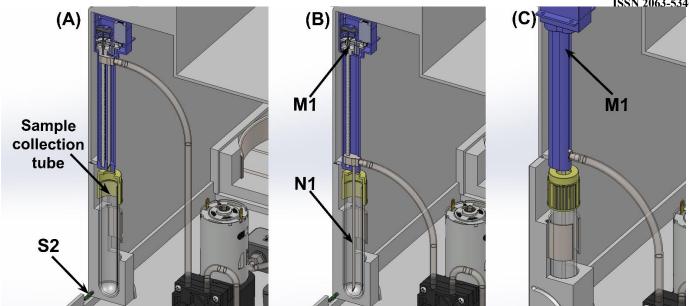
(A), (B) Cut section view in closed position of automatic sample collection tube holder, (C) closed position view of automatic sample collection tube holder.
